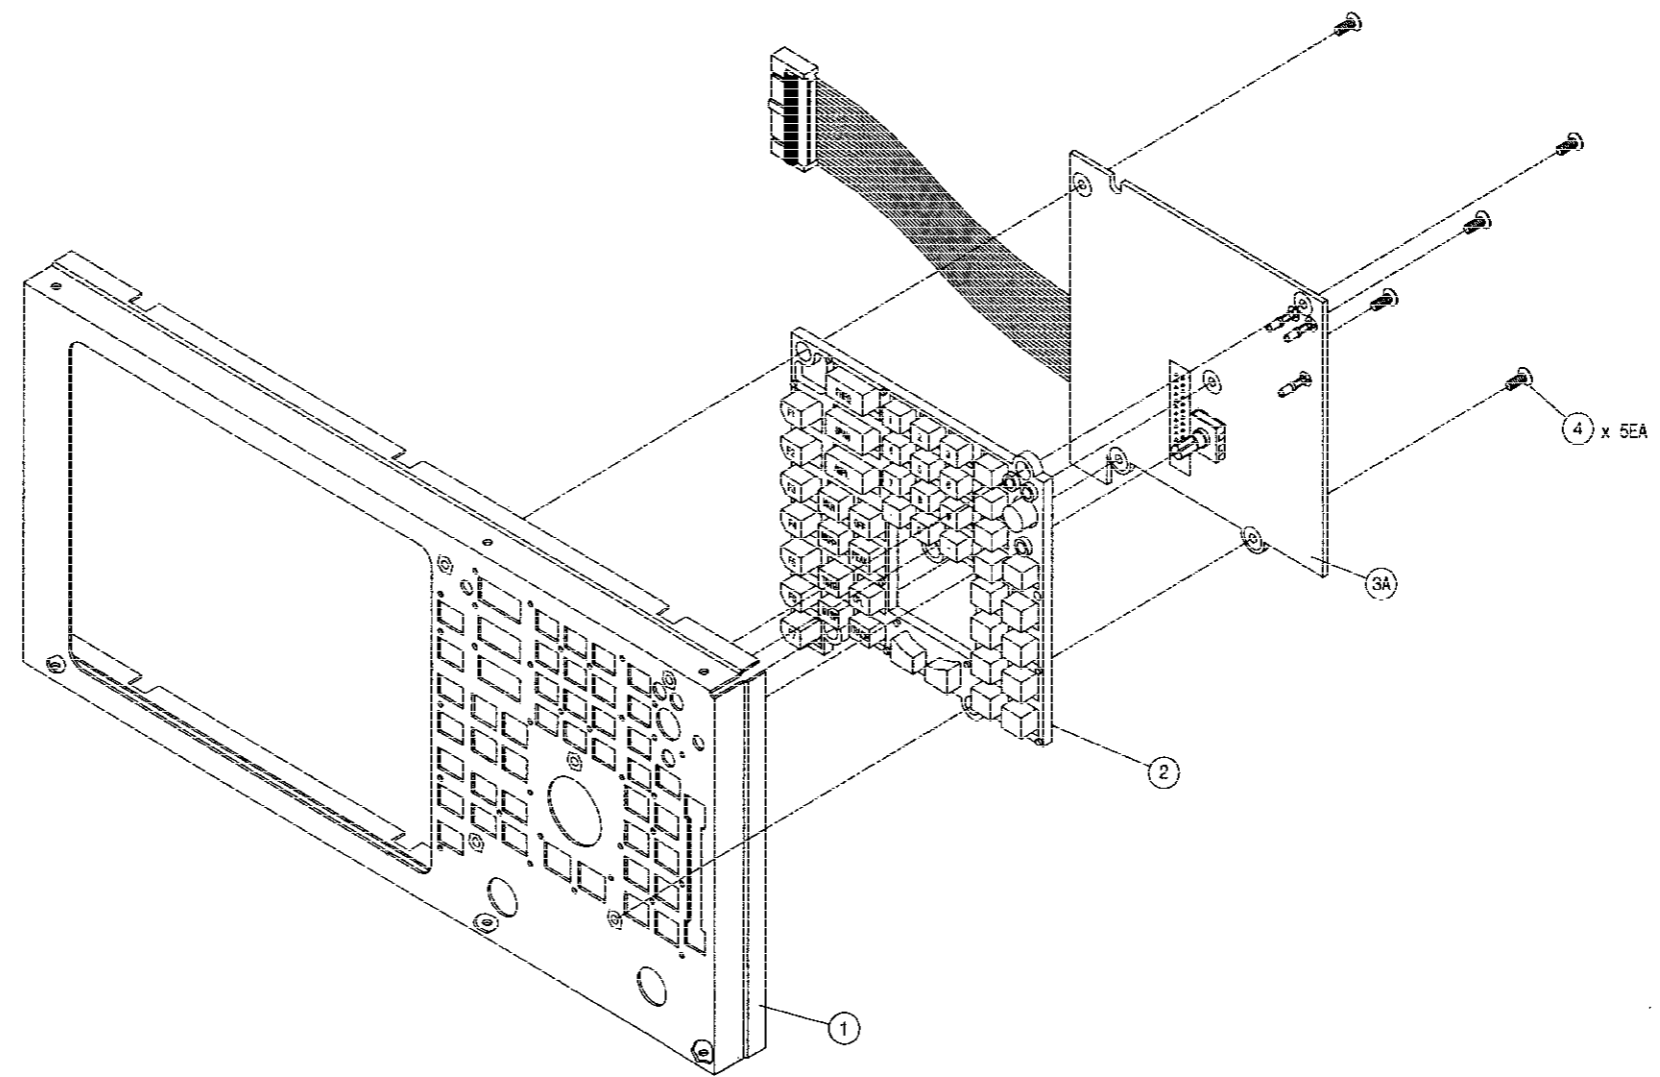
FRONT FRAME ASSEMBLY 7-9
